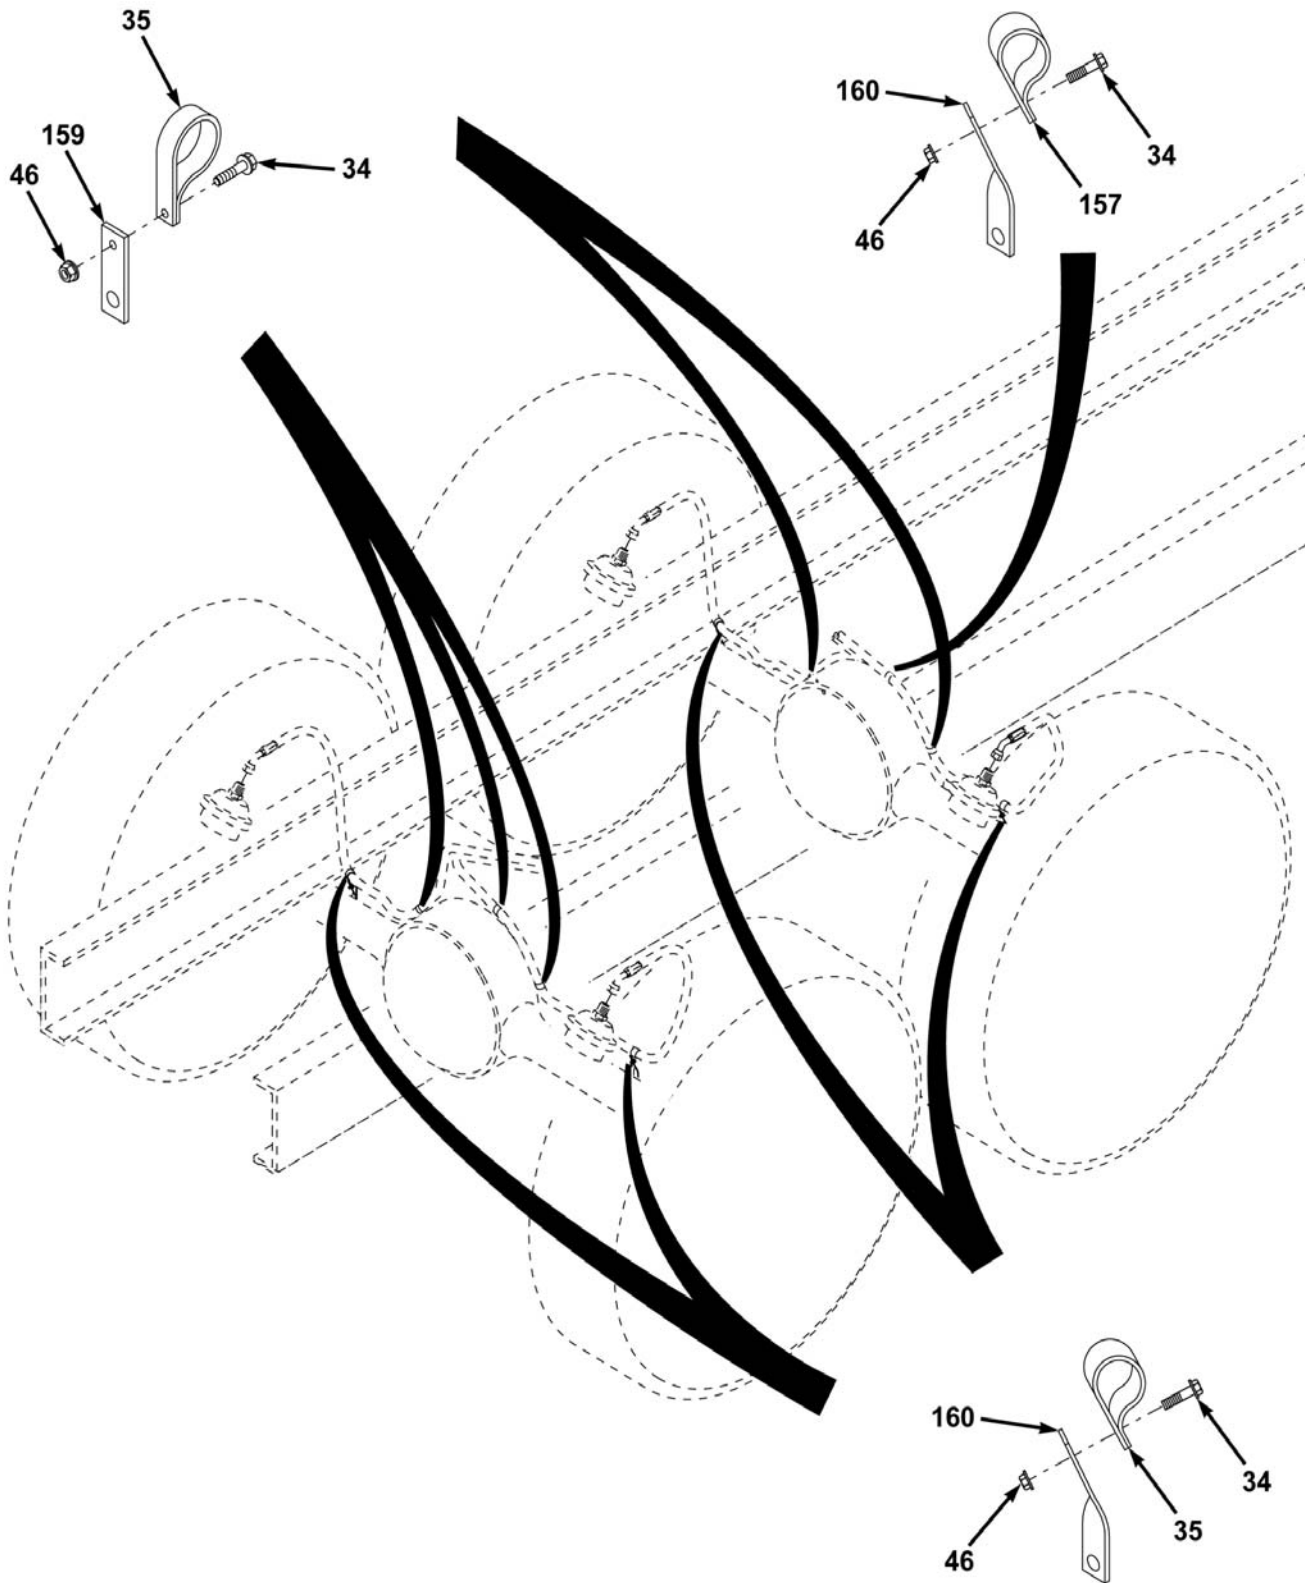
CHASSIS AIR (SHEET 11 OF 15)
